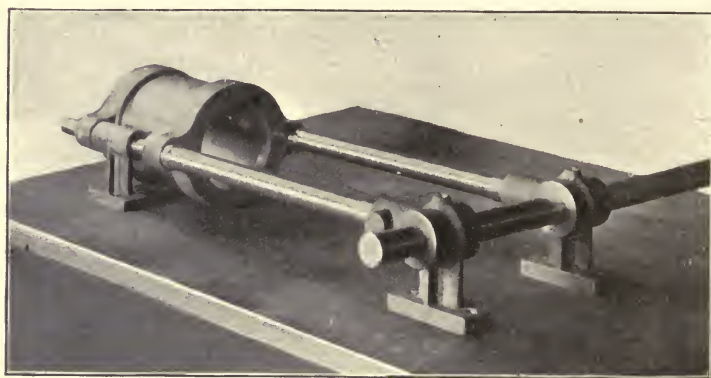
CYLINDER COLLARS, SIDE RODS AND MAIN BEARINGS ASSEMBLED TO TEST ACCURACY OF WORK.
